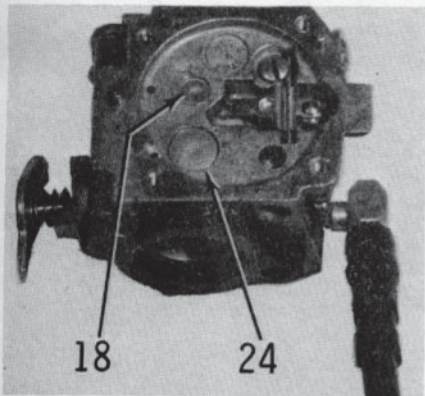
View showing location of welch plugs (18 & 24—Fig. S12).
